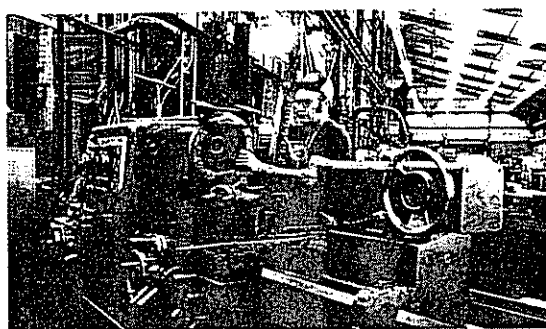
Shipyard machine shop (courtesy Ingalls Shipbuilding)
